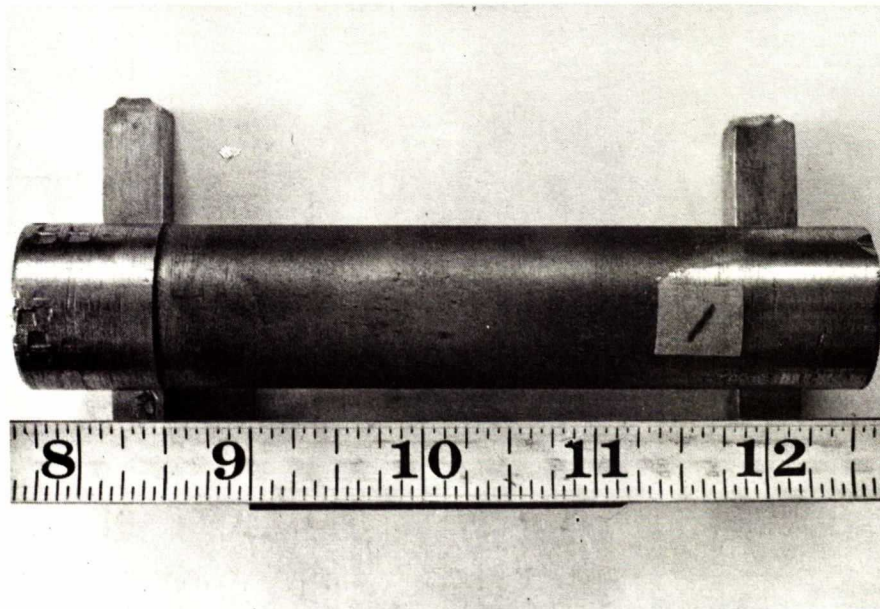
Core piece containing defect No. 27, after magnetic particle testing.
